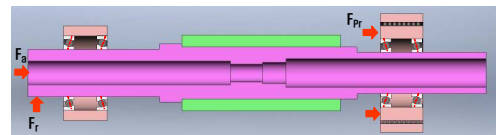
Simplified spindle unit with front and rear bearings, cutting forces
